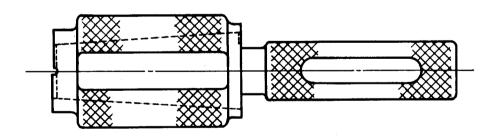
55231X CLUTCH TAPER PLUG AND RING GAUGE ASSEMBLY
